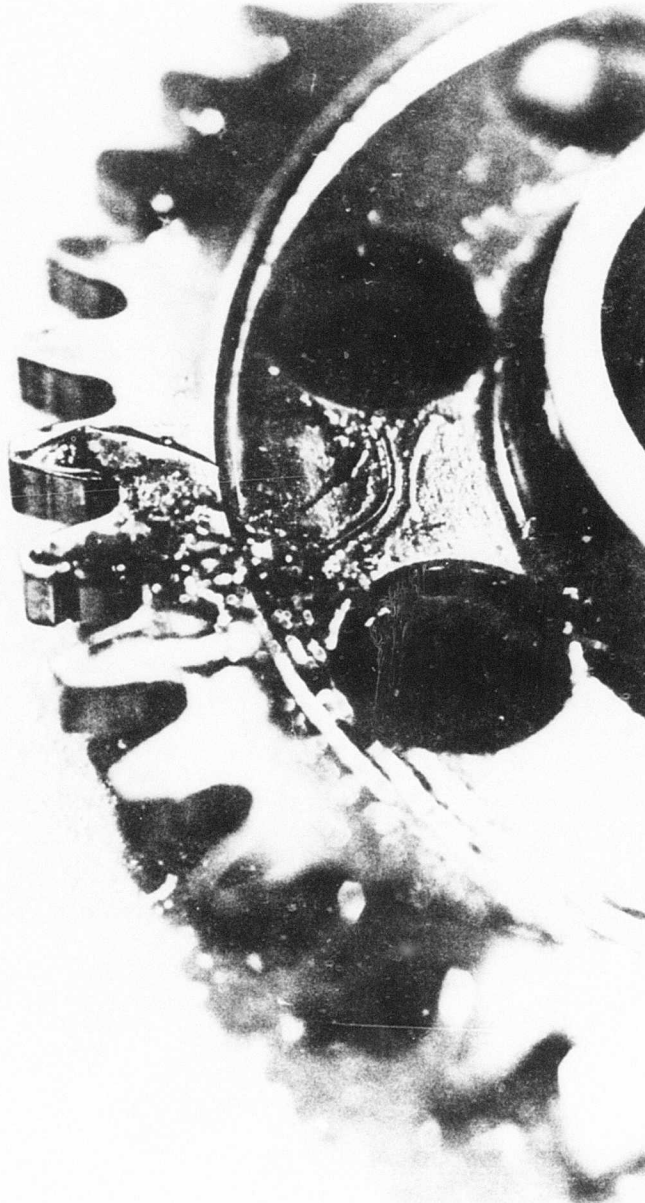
Gear With 0.050-Inch-Wide Tooth Fault.
